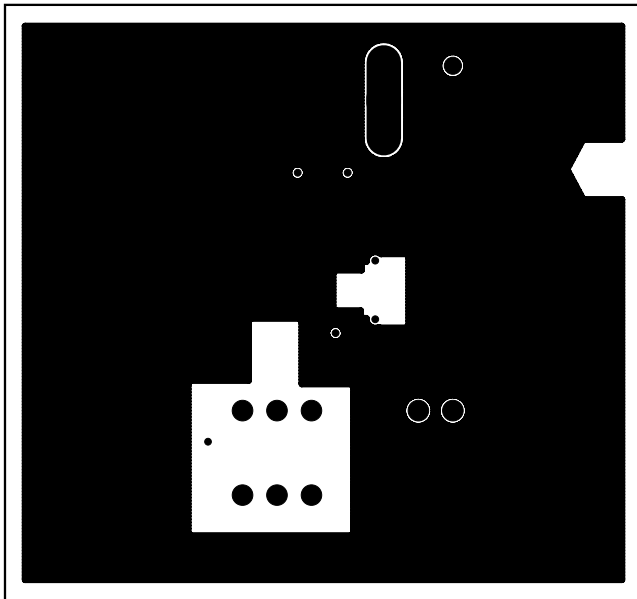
MAX3812 EV Kit PC Board Layout—Ground Plane
